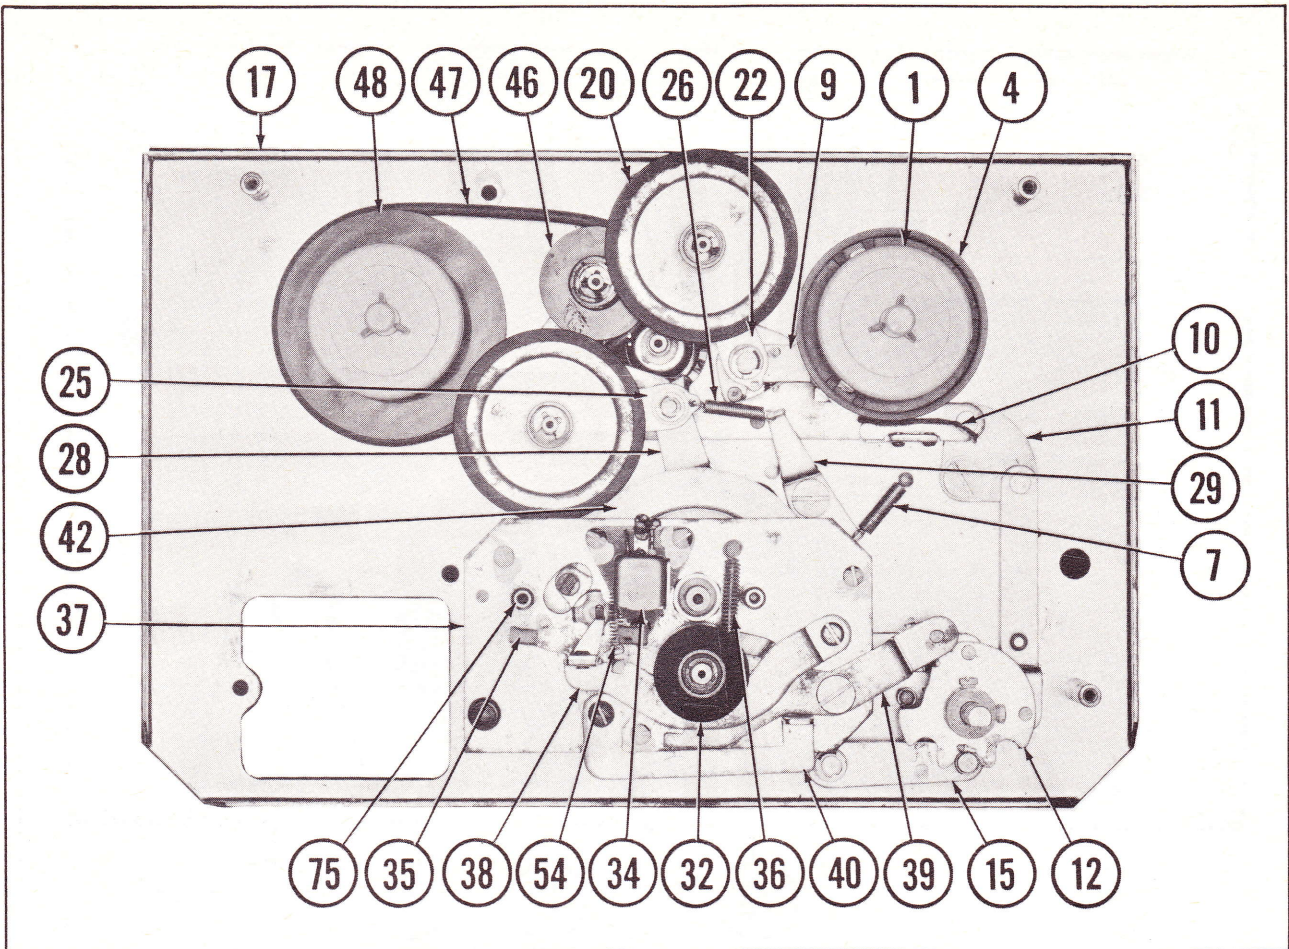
TOP VIEW OF MECHANISM WITH DRESS PLATE REMOVED
